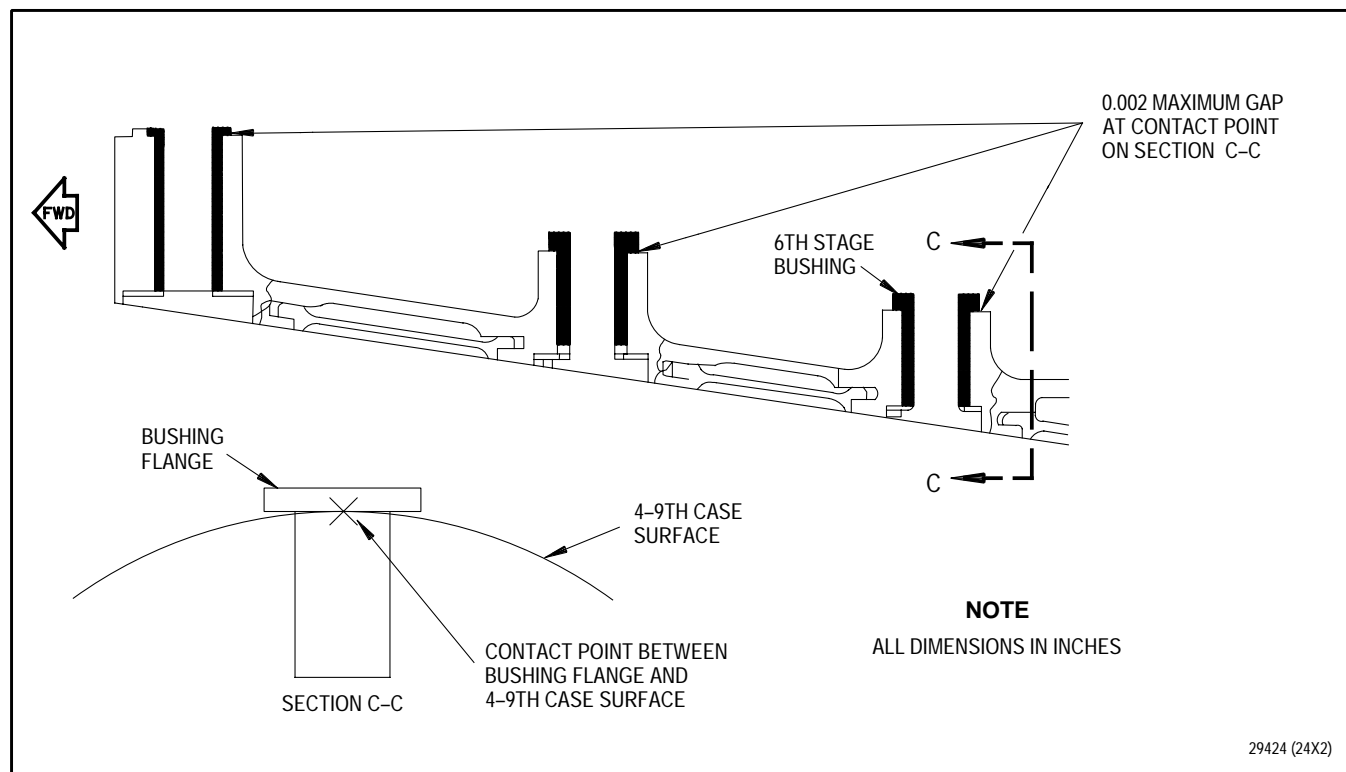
C. Sixth Stage Compressor Stator Bearing (Bushing) - Installation Using PWA 57782 Pusher/Puller, Detail of PWA 57790
